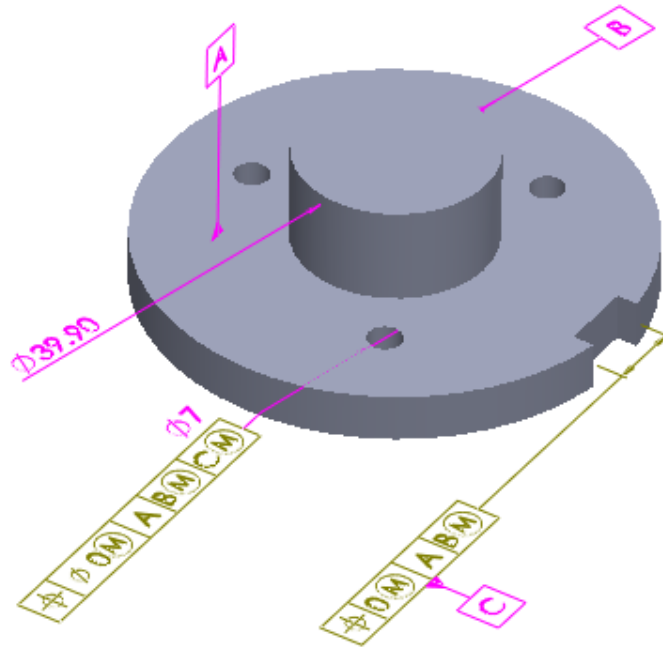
37: Location Tolerances for Both Slot and Pattern of Holes
